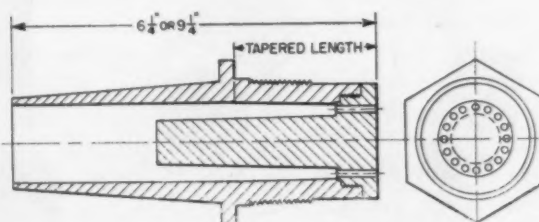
Sketch of a tube die showing upwardly converging taper on die wall, downwardly converging taper on mandrel. Note method of providing a rigid assembly of the two parts and means for molten metal entry into the die.
